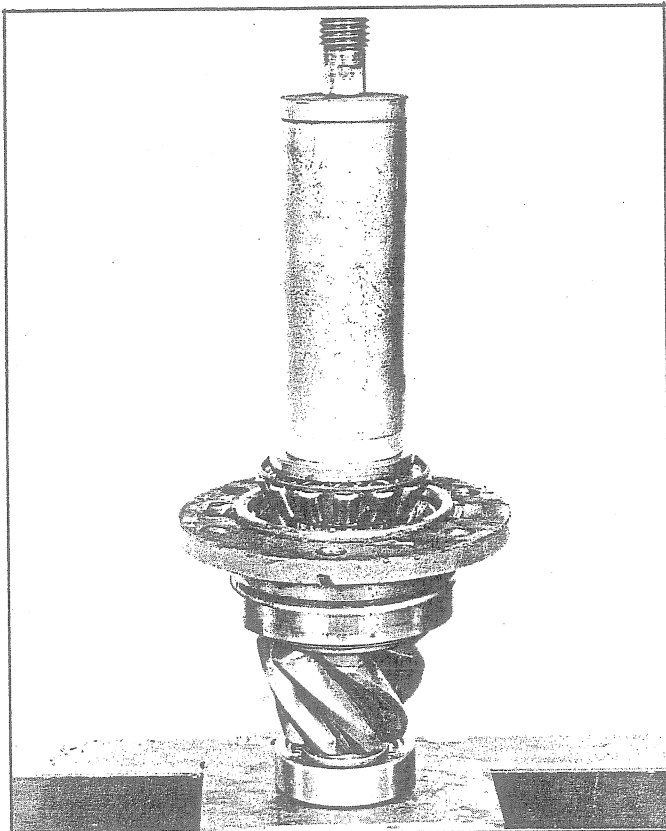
Pressing Outer Bearing on Pinion Shaft
